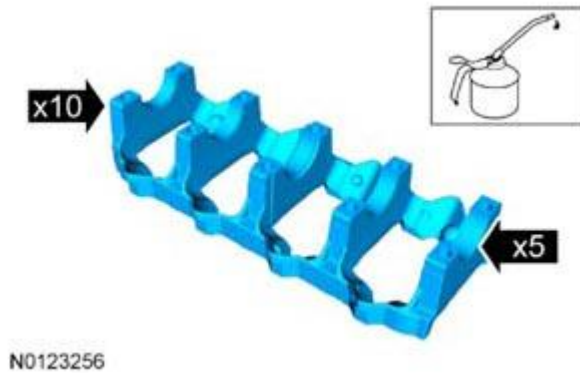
Lubricating Main Bearing Beam Side Fit Surfaces And Main Bearing Beam Bearings
